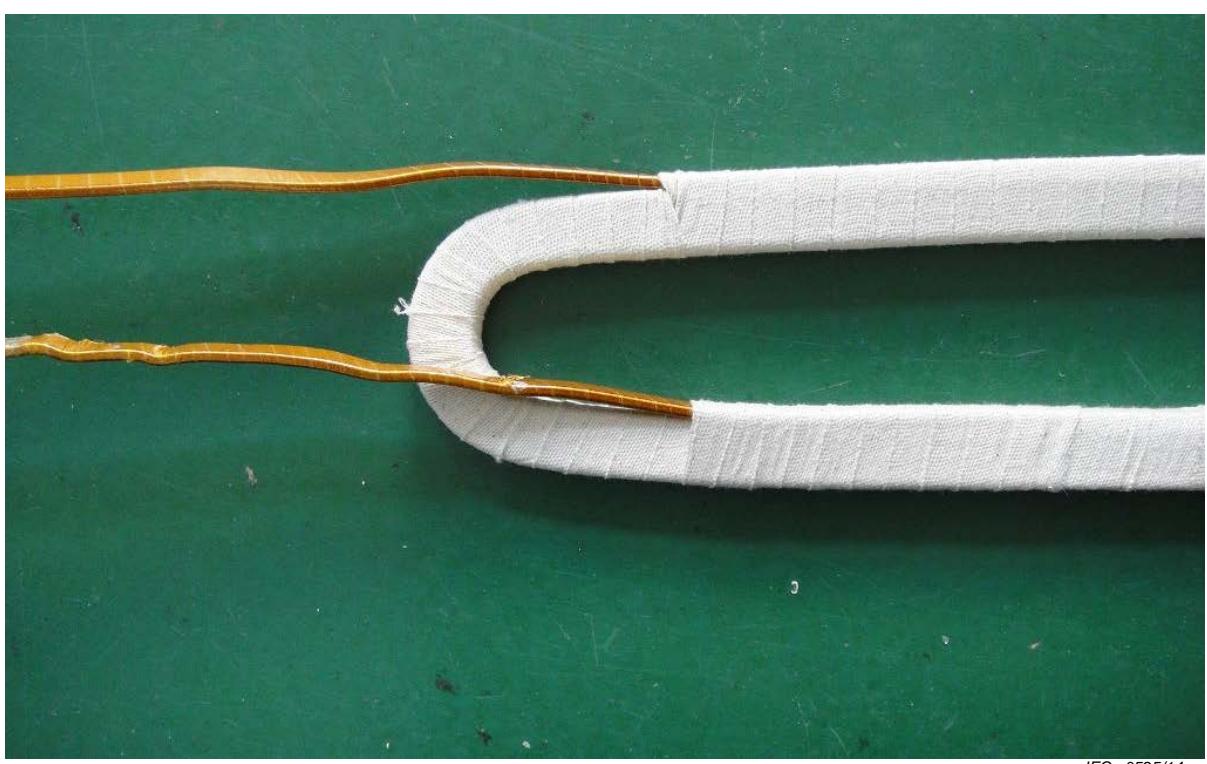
Un-formed coil completely wrapped with protective fabric
